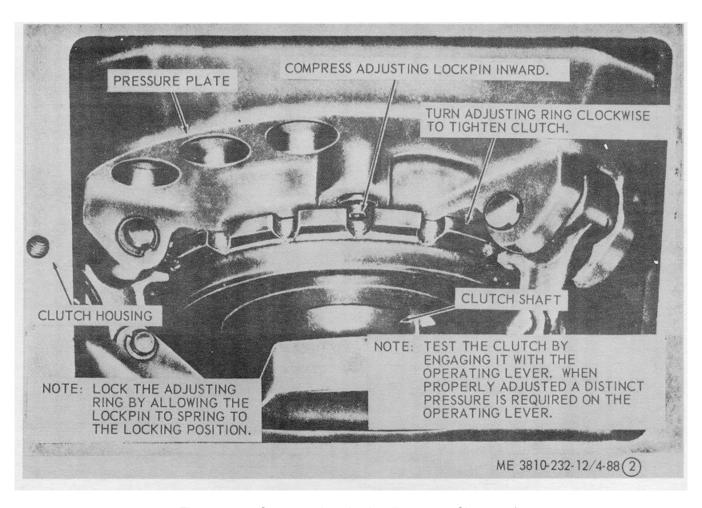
Crane engine clutch adjustment. Sheet 2 of 2
